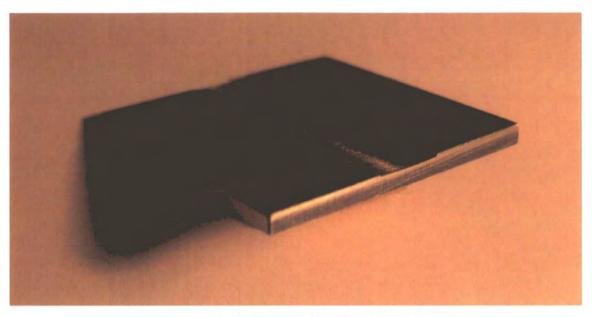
Section of C1 Weld from TRIAL 3
